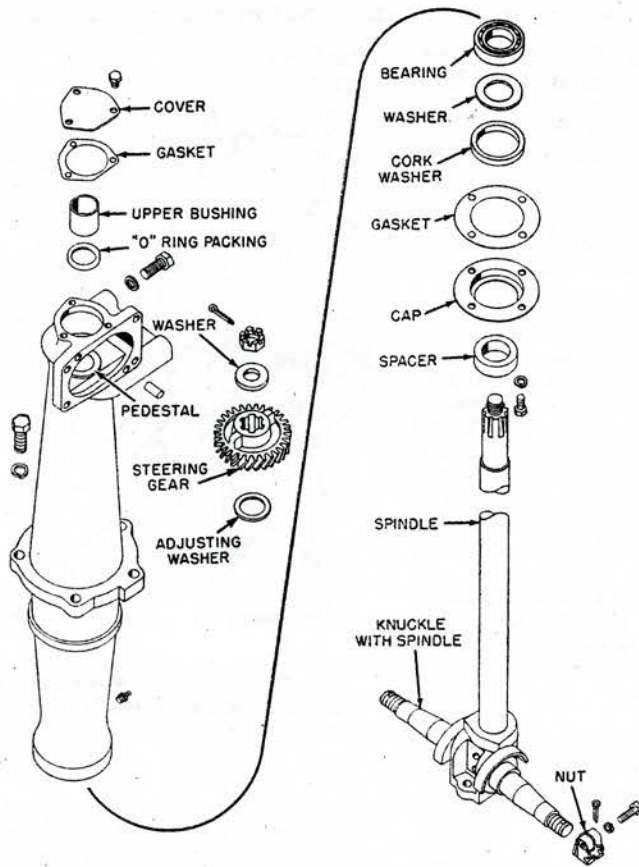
A Exploded view of Model 60 standard one-piece front end pedestal. Model 50 is similar
